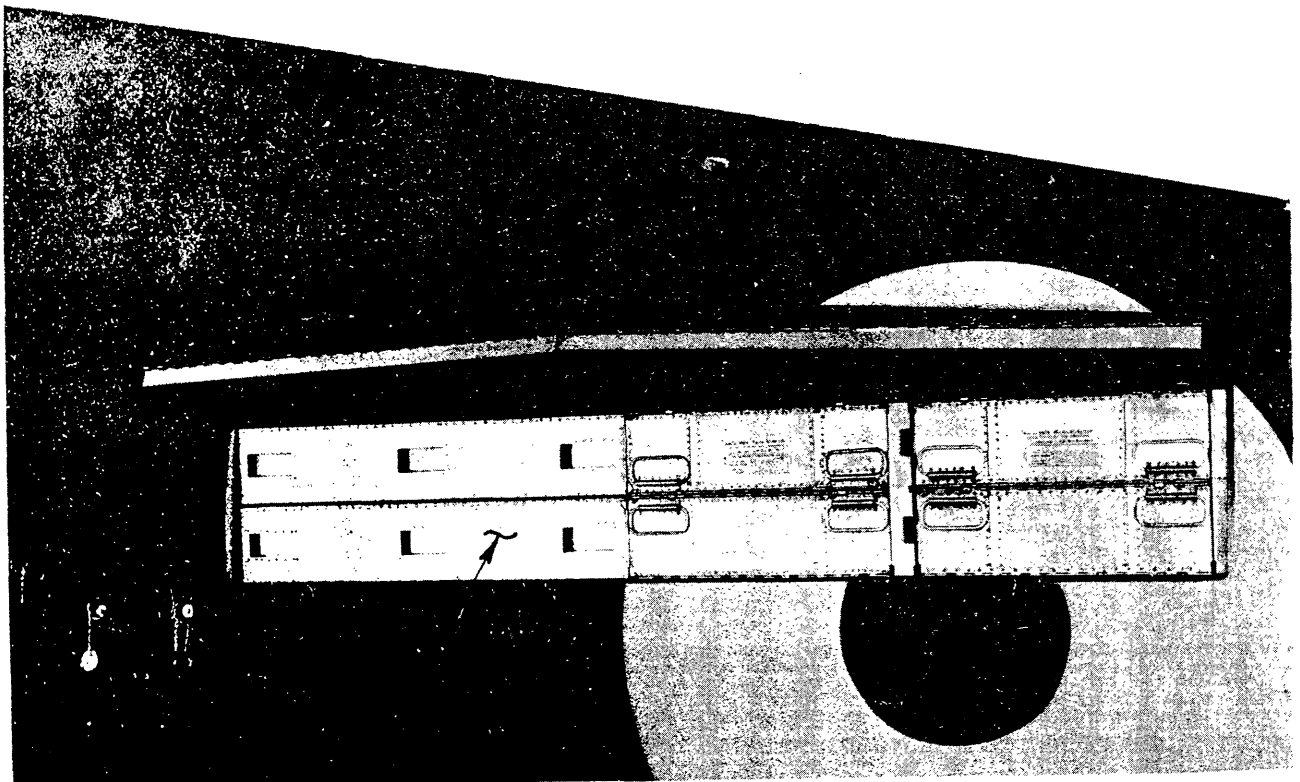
Wing Guns - Plan View Ammunition Boxes &amp; Chutes Installed
